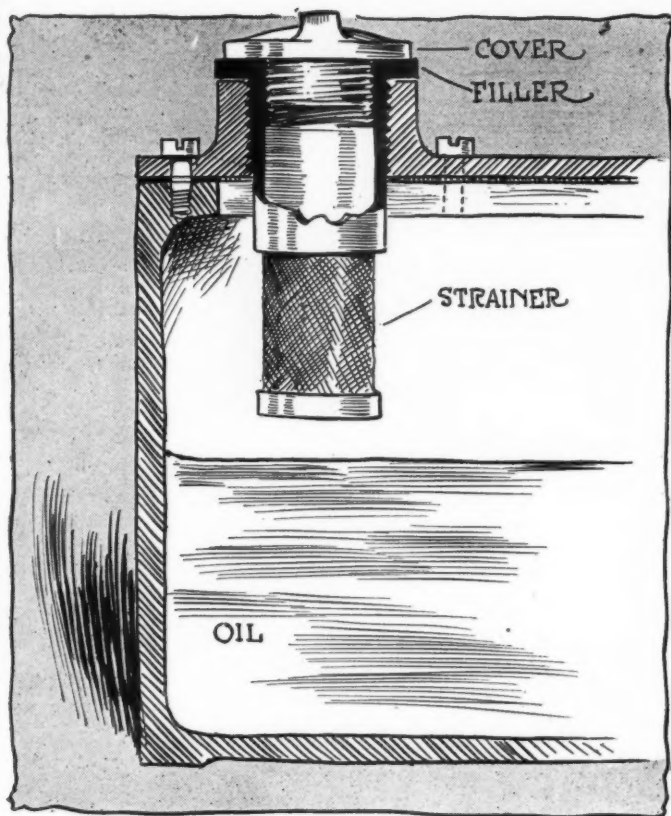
Oil reservoir of Vermont motor, showing filters for the oil
